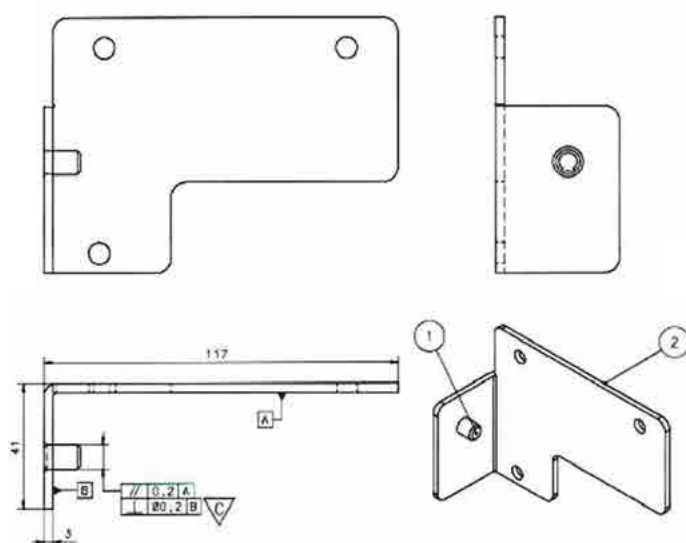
Hinge element design: 1 - pin, 2 - shape
